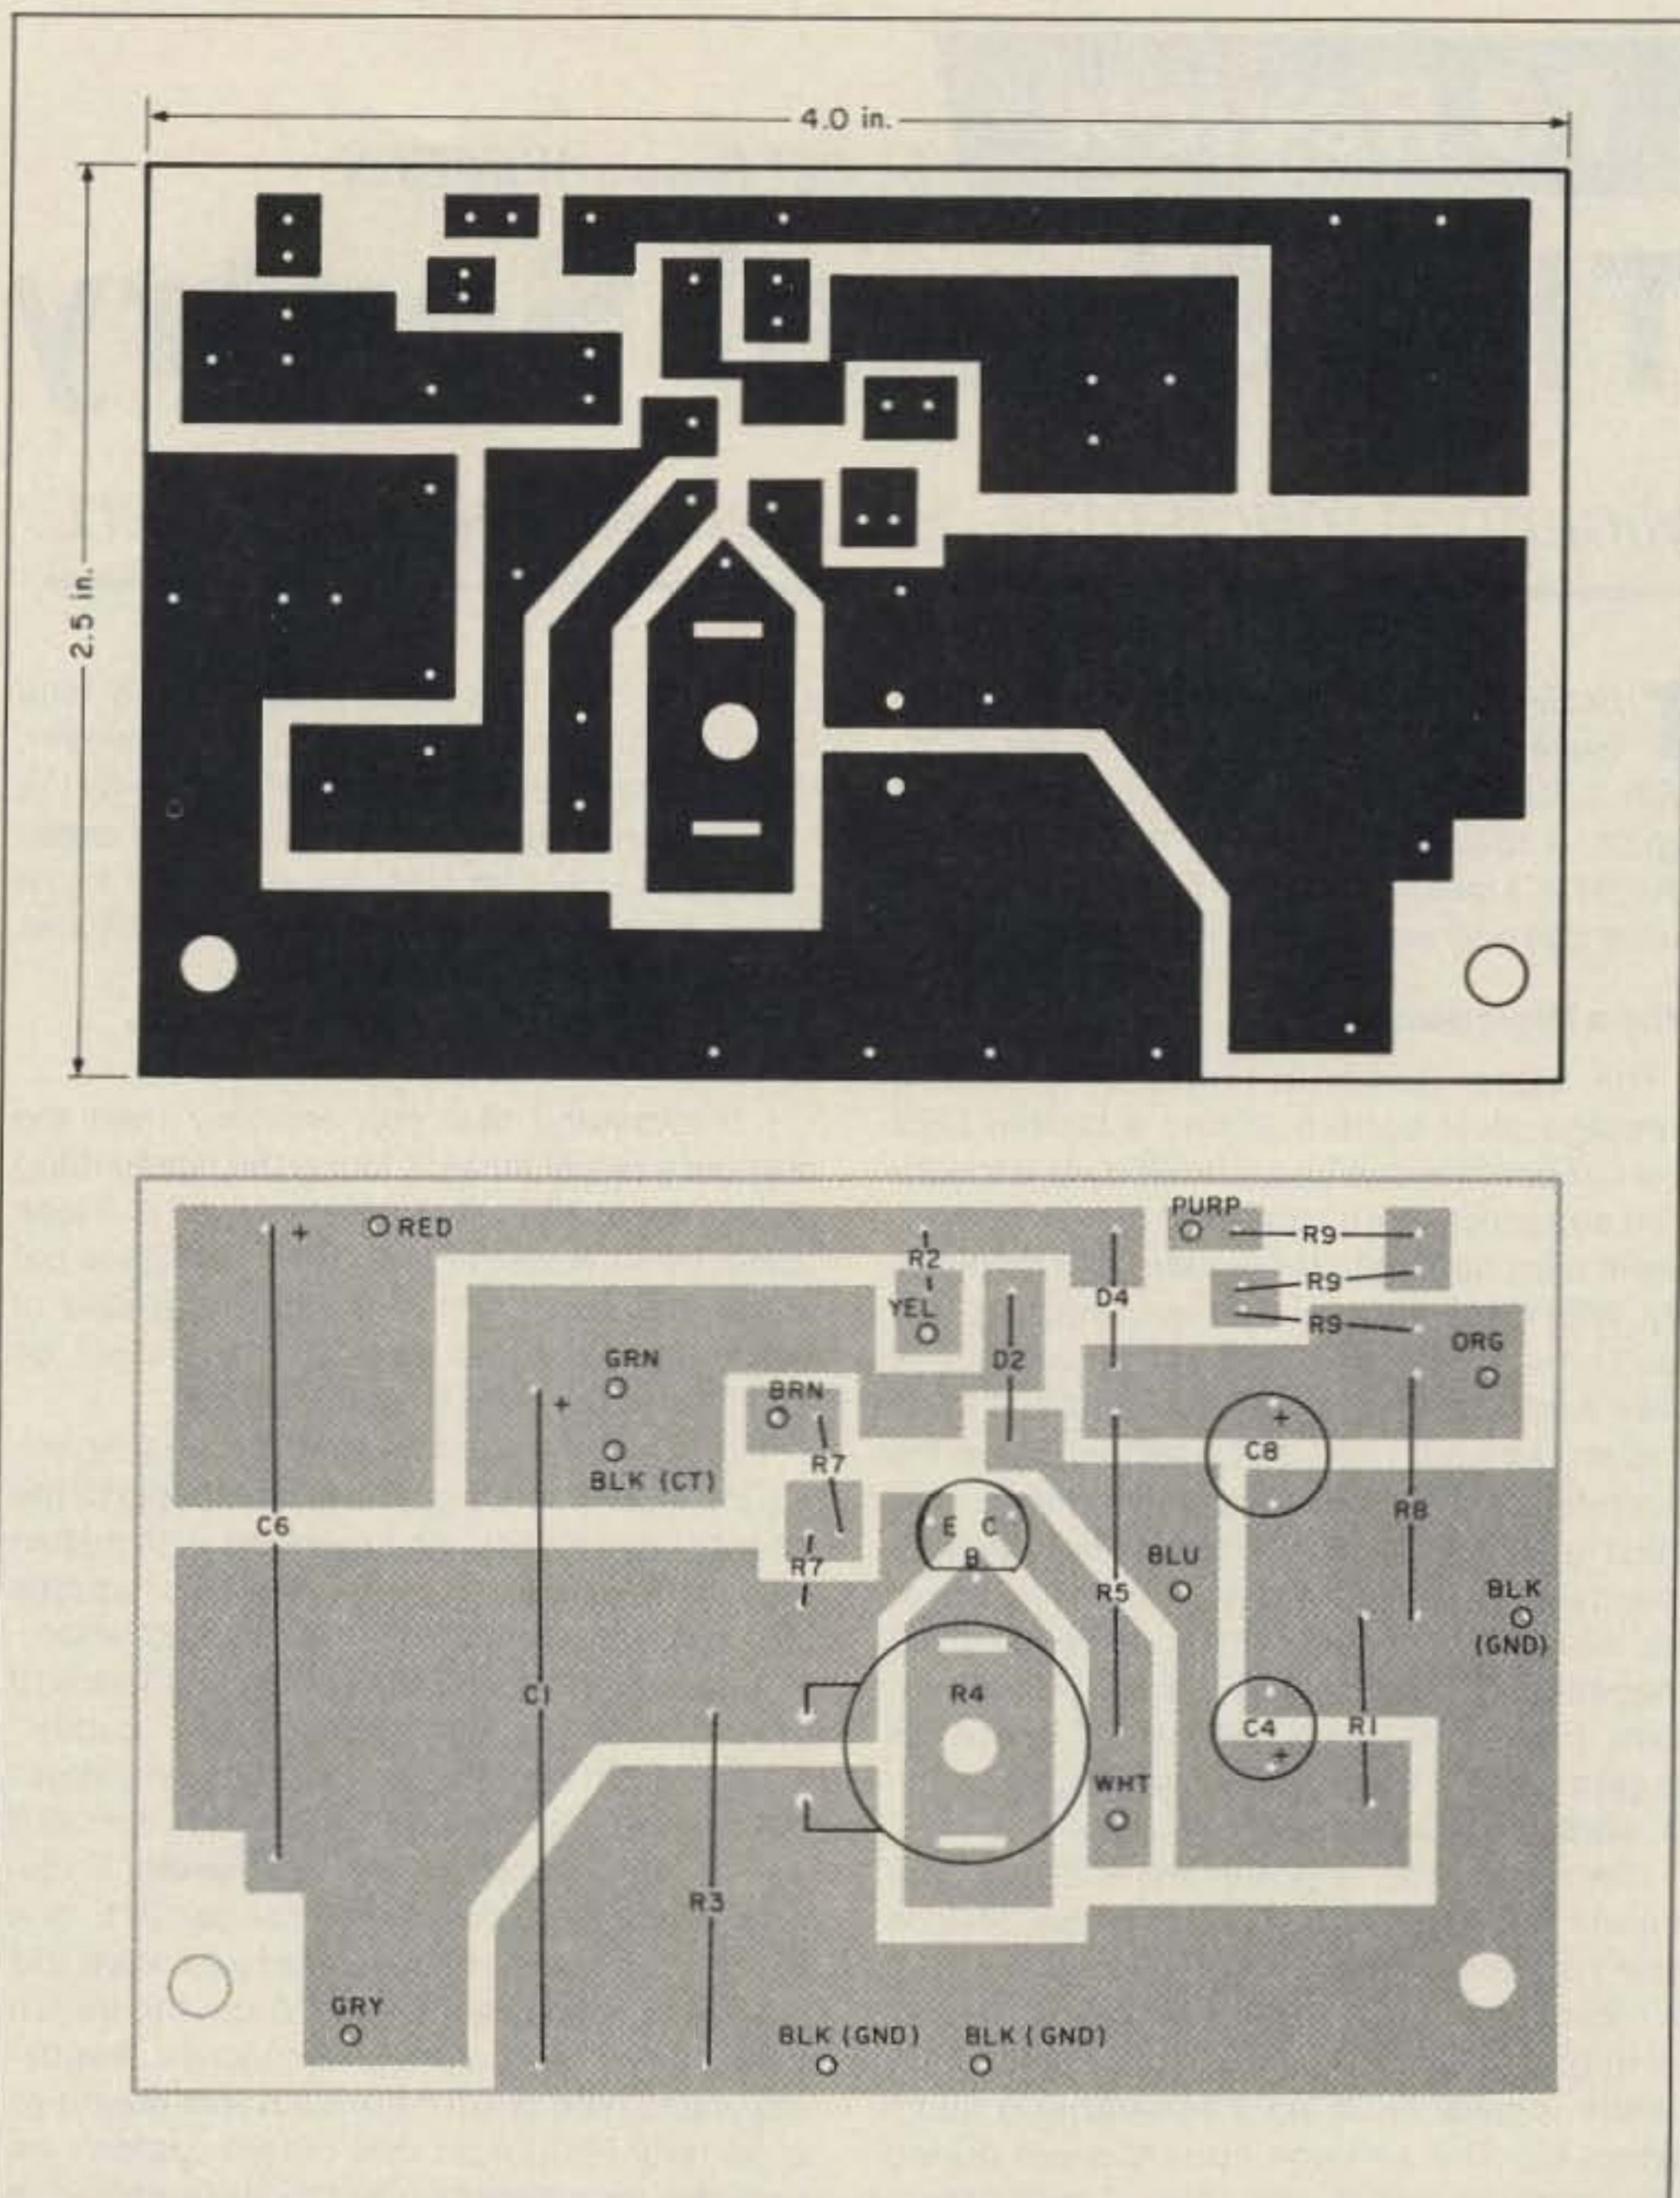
(a) Printed circuit board foil pattern; (b) Top side of board, showing component placement.
